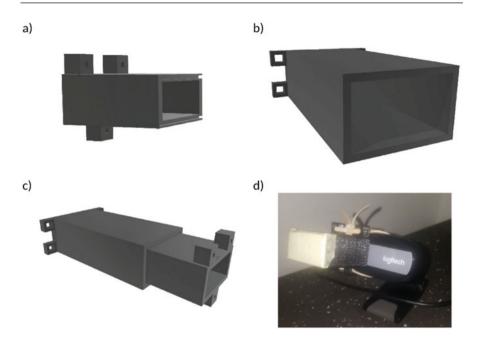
The housing design showing (a) the inner housing, (b) the outer housing, (c) the assembled housing, (d) the diffuser attachment
